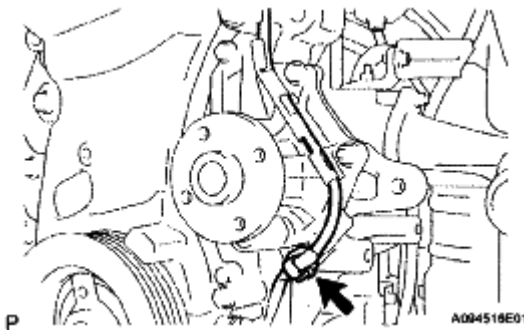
Locating Clamp Of Crankshaft Position Sensor From Water Pump
